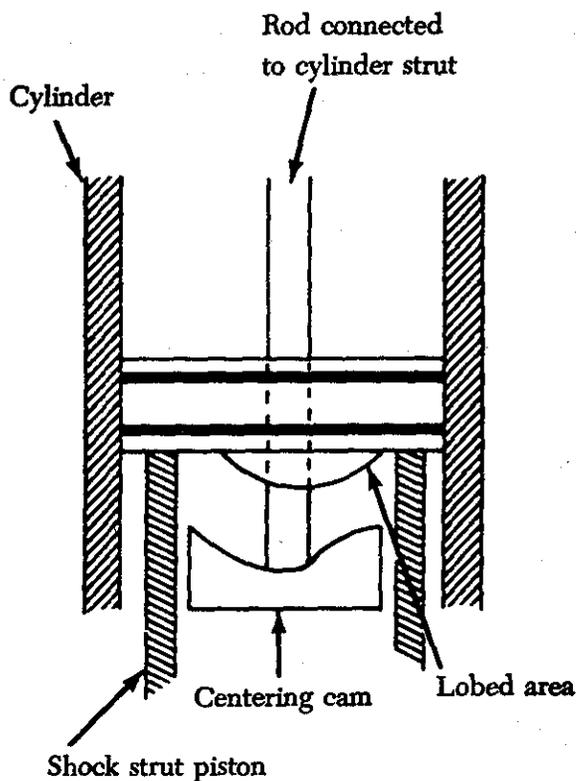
Cutaway view of a nose gear internal centering cam.
